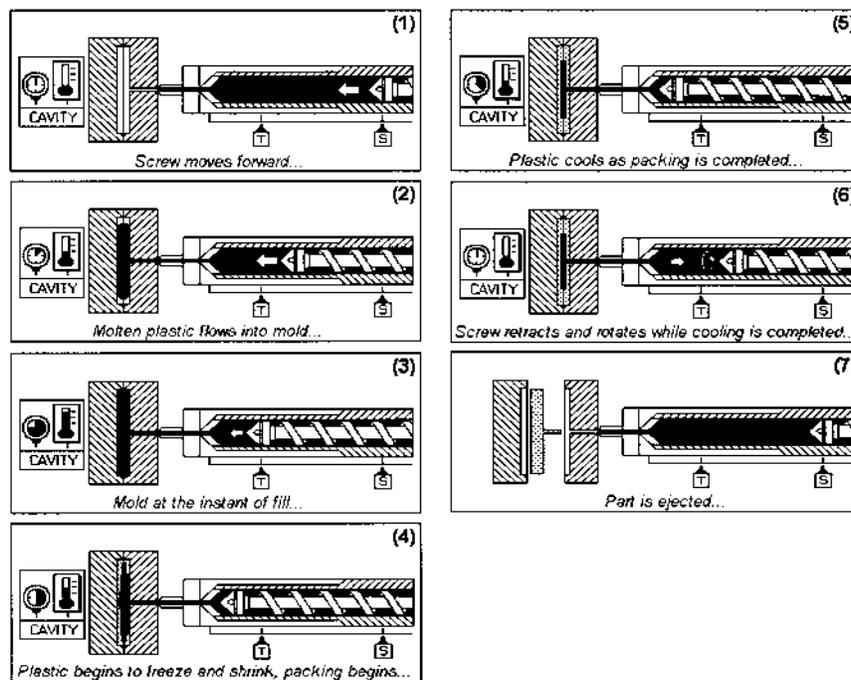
Injection molding cycle. Injection molding is a complex process that produces intricate parts inside a closed mold under high pressures. It is probably the most capable and versatile of all plastic processes.
